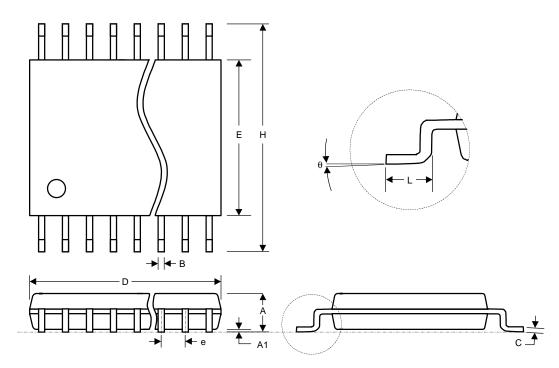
24-Pin Thin Shrink Small Outline Package (TSSOP)
